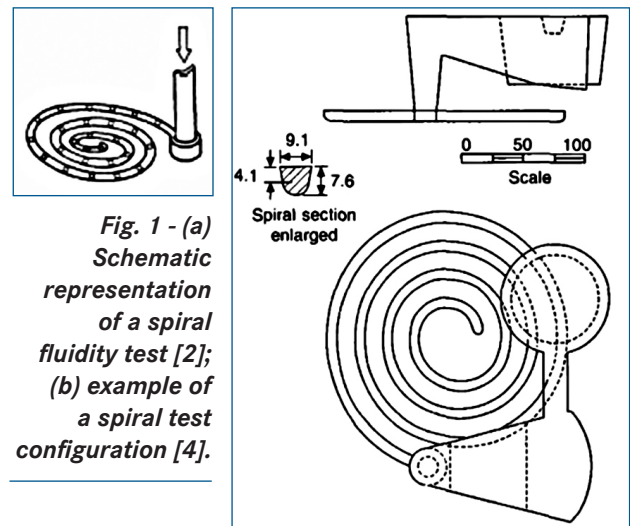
(a) Schematic representation of a spiral fluidity test [2]; (b) example of a spiral test configuration [4].
